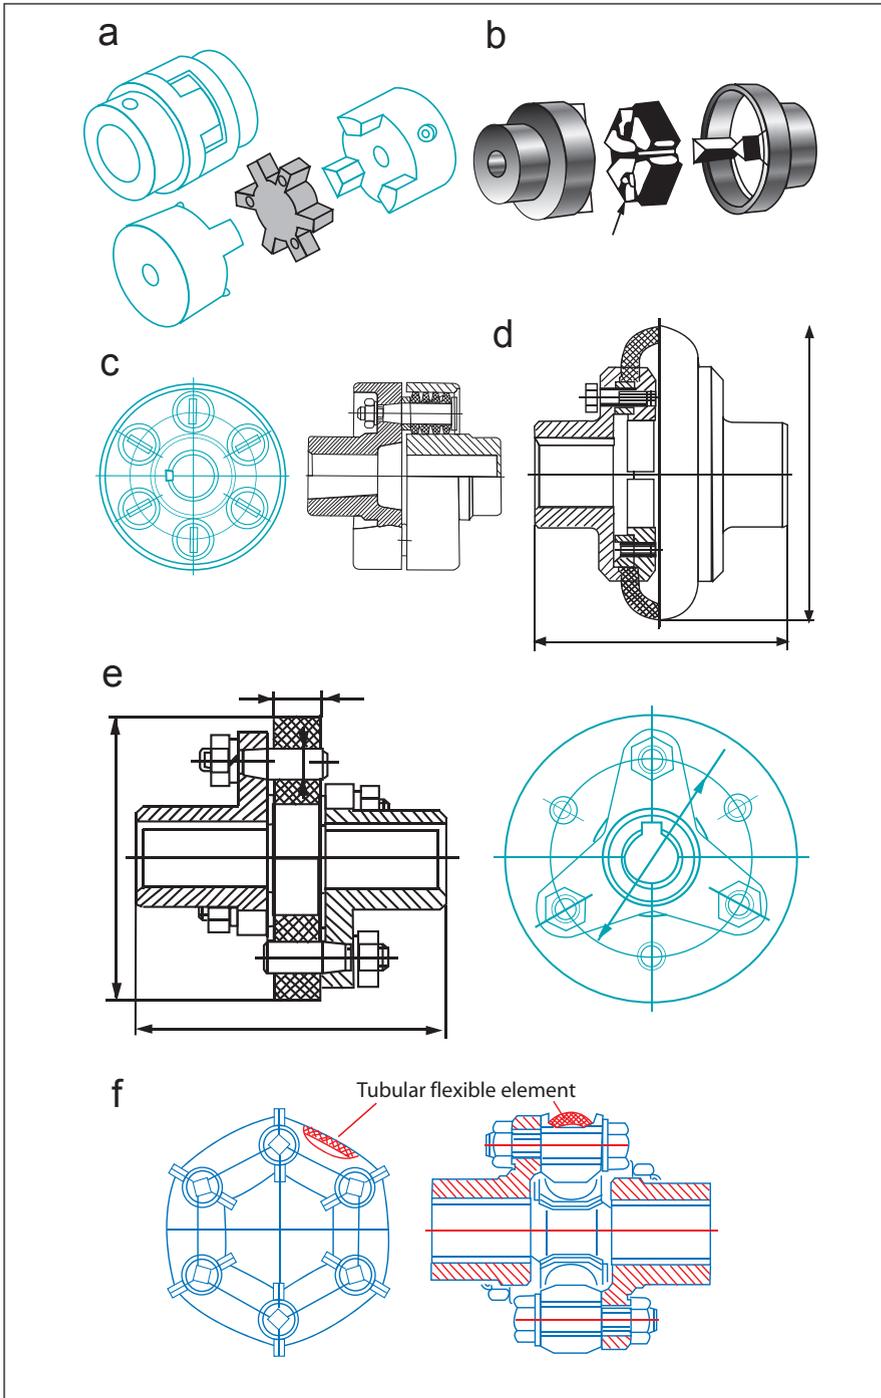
Some combination purpose couplings: a) spider (jaw) coupling; b) modified spider coupling (lip providing bulging space for the rubber element); c) finger-sleeve coupling; d) toroid shell coupling; e) rubber disc coupling; f) Centaflex coupling.
